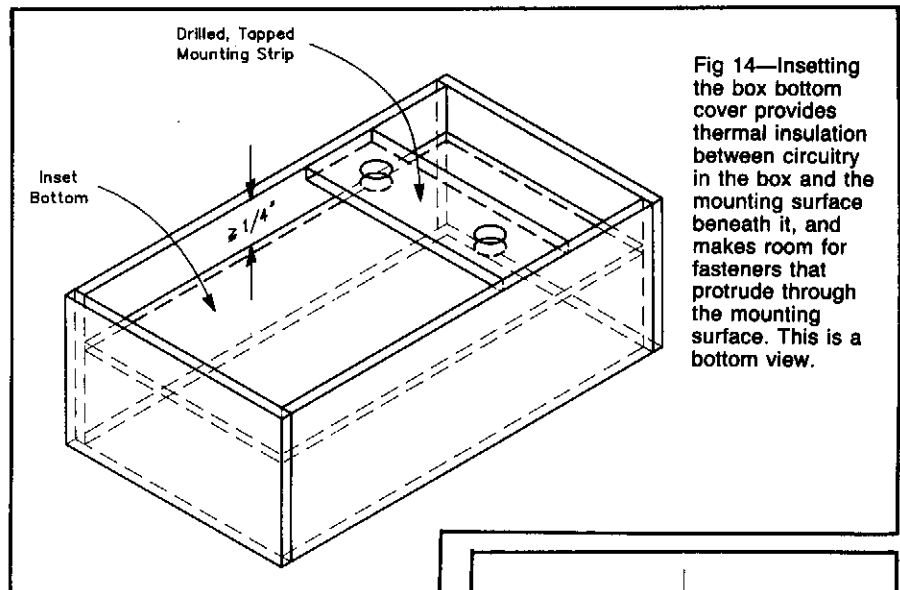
Inserting the box bottom cover provides thermal insulation between circuitry in the box and the mounting surface beneath it, and makes room for fasteners that protrude through the mounting surface. This is a bottom view.
